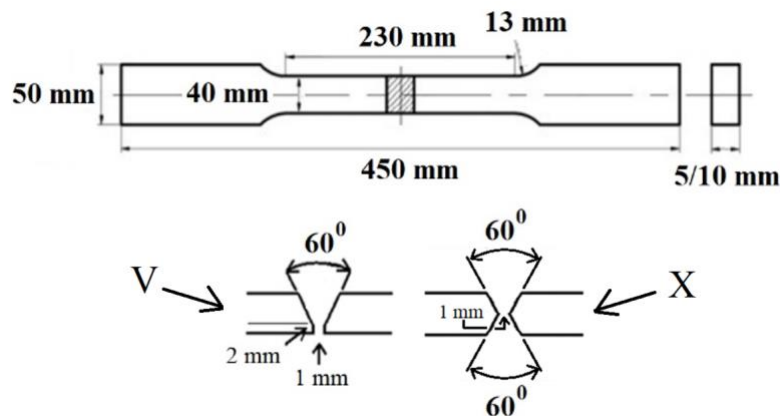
Samples dimensions for tensile test made according to ASTM E8/E8M [17]
